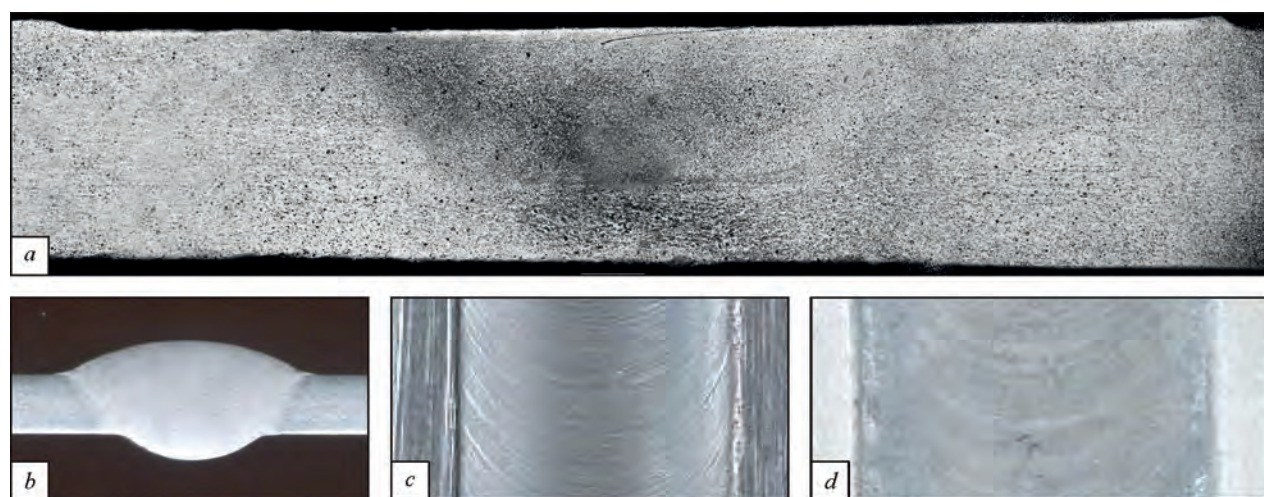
Transverse sections (a, b) and appearance of face surfaces of welds (c, d) of AMg6M alloy 1.8 mm thick, made by FSW (a, c) and TIG welding (b, d)
